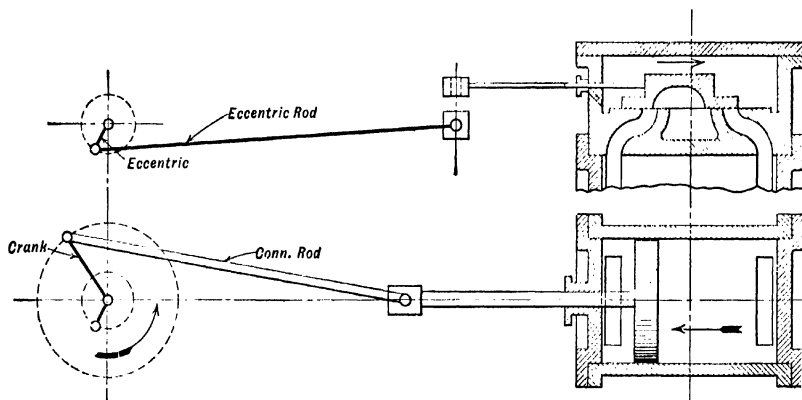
Positions of Crank and Eccentric at Point of Head End Cut-off.
